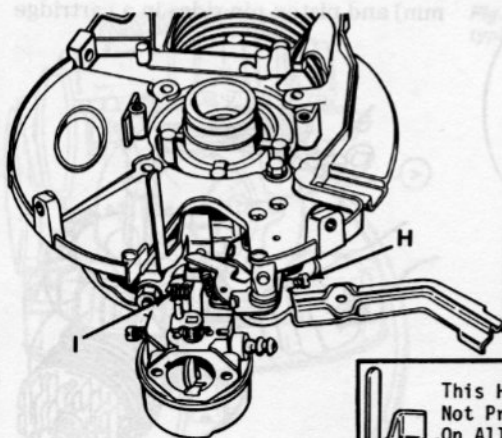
View of governor and carburetor linkage on vertical engine with variable engine speed control. Turn screw (I) to adjust idle speed and screw (H) to adjust high speed.
